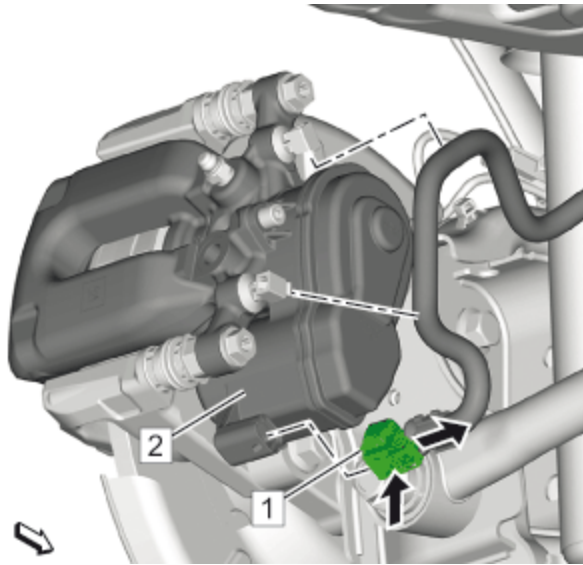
Brake Caliper Assembly And Lectrical Connector
